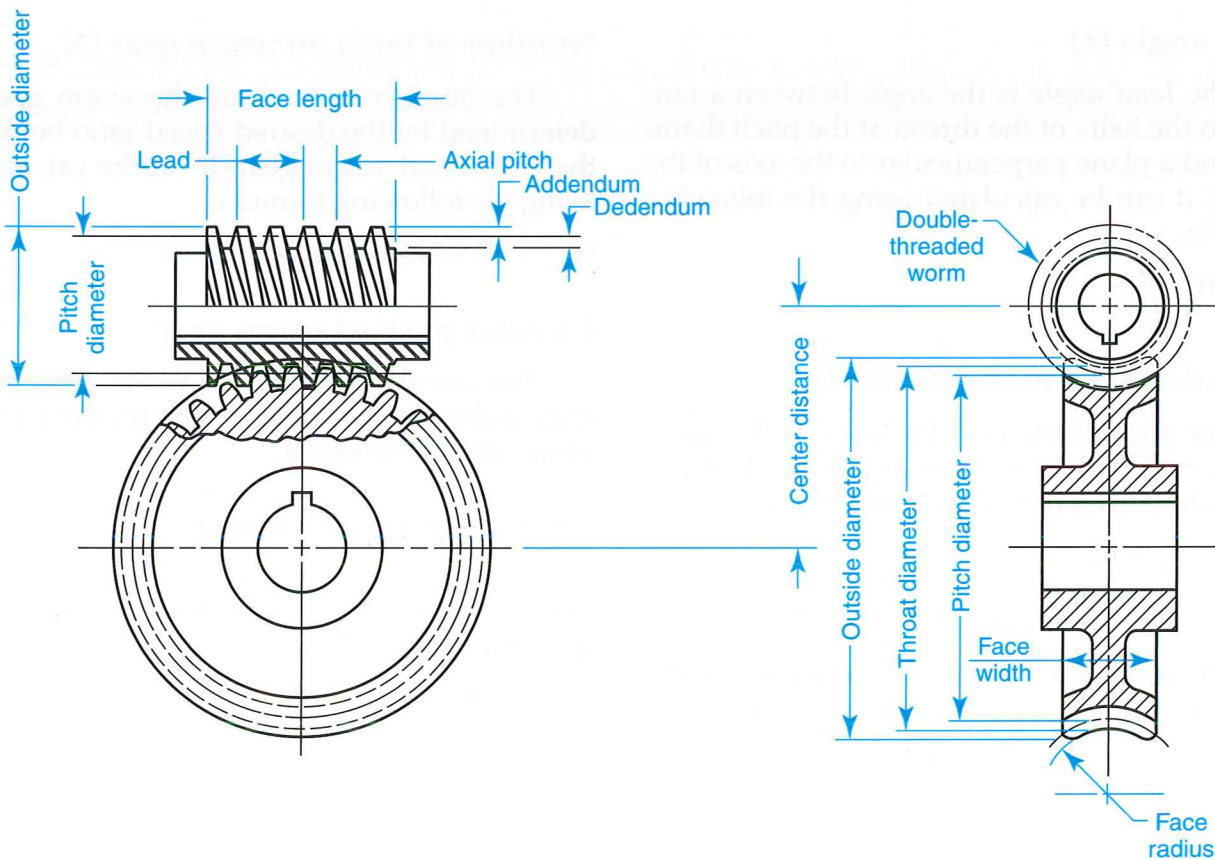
There is specific terminology that applies to worm gears. The drafter must know and understand these terms. Shown is a double-threaded worm and worm gear.
